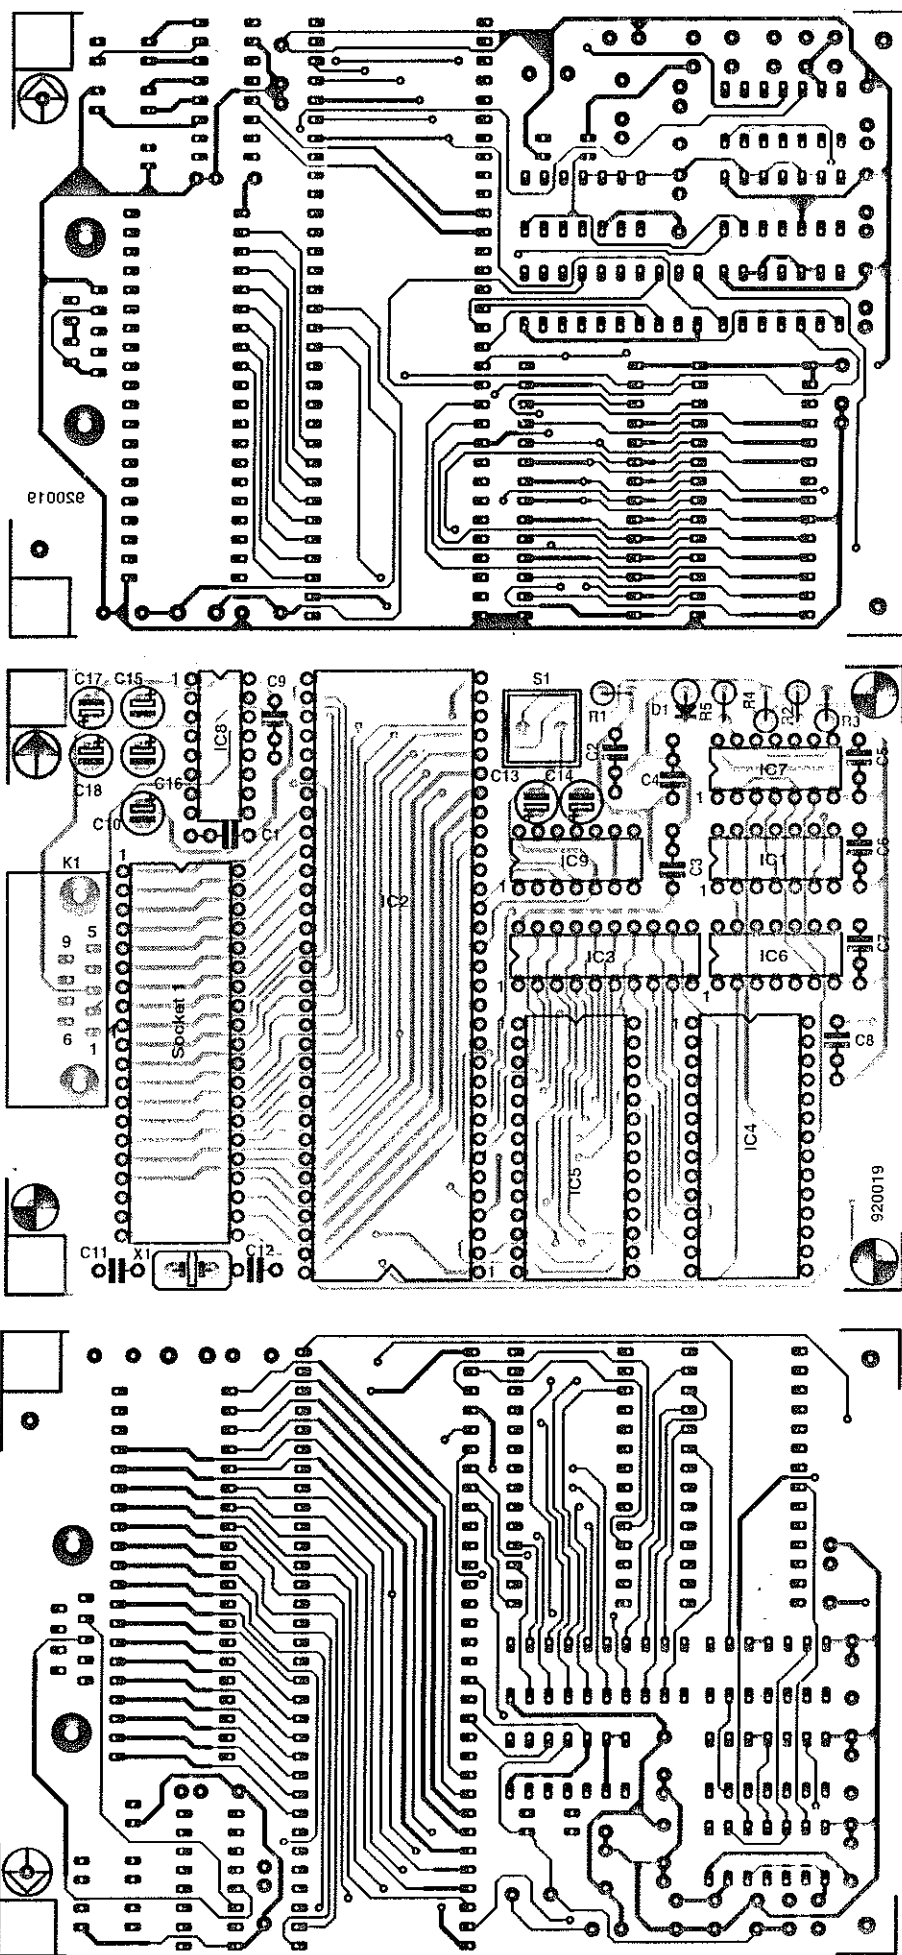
Track layouts (component side and solder side) and component overlay of the double-sided, through-plated printed circuit board.
